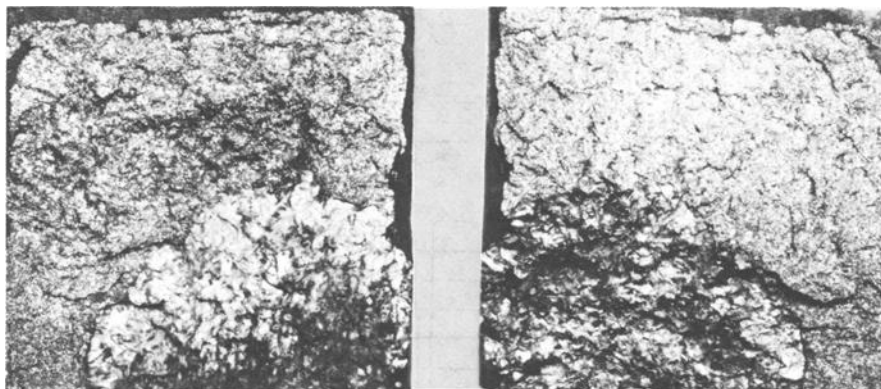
Hydrogen flake broken open to show fracture surfaces. ID surface from the bottom, X4 (reduced one fifth for reproduction).
